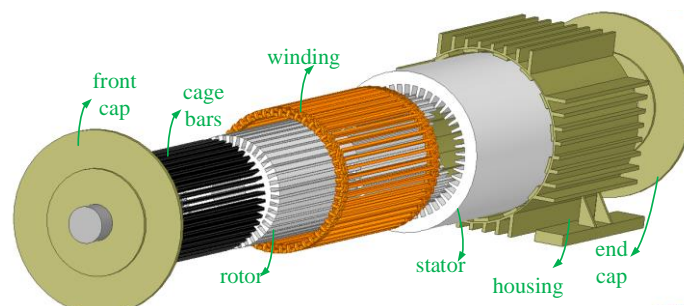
The exploded view of the induction motor [20] © 2020 IEEE.
